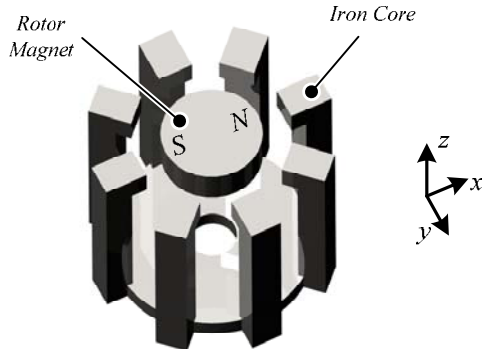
Basic setup of a bearingless slice motor for a centrifugal pump with a diametrically magnetized rotor
